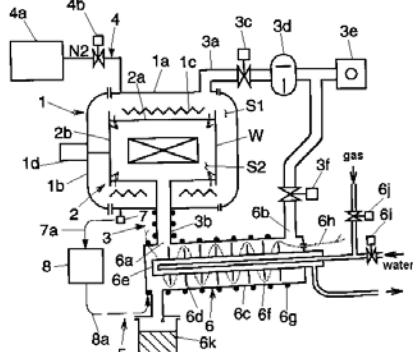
Schematic view of vacuum dewaxing & sintering furnace
